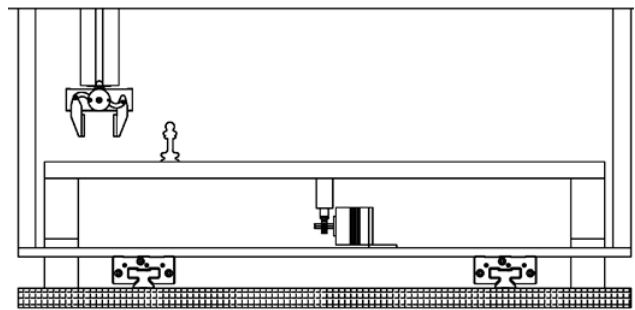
Y Axis linear slides and stepper motor. This picture was drawn using AutoCAD educational software.
